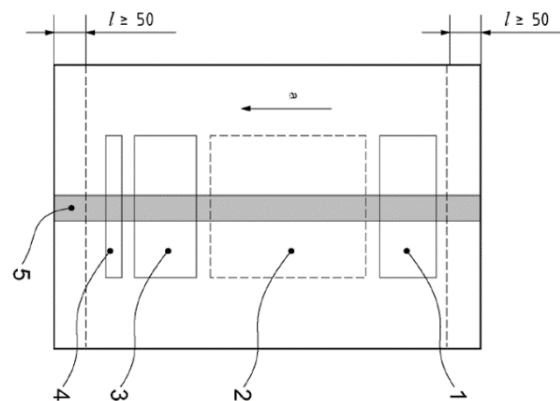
1) Designated zone for tensile, bend, or fracture specimen extraction; 2) Additional area for optional specimens; 3) Secondary zone for tensile, bend, or fracture specimen extraction; 4) Area allocated for macroscopic examination; 5) Weld seam; l: Discarded length at both ends of the weld to eliminate non-representative regions influenced by tool entry and exit [241].
